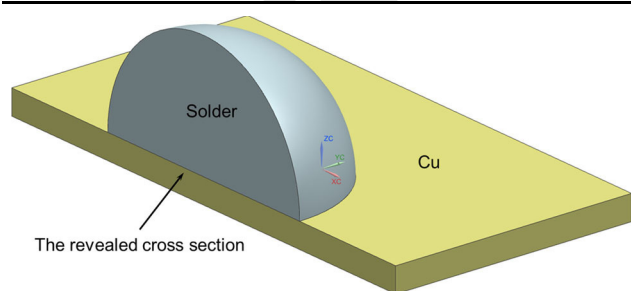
Schematic of the specimen for investigating the planar growth of IMCs within 99Sn-1Cu/Cu solder joints after aging at 175°C
